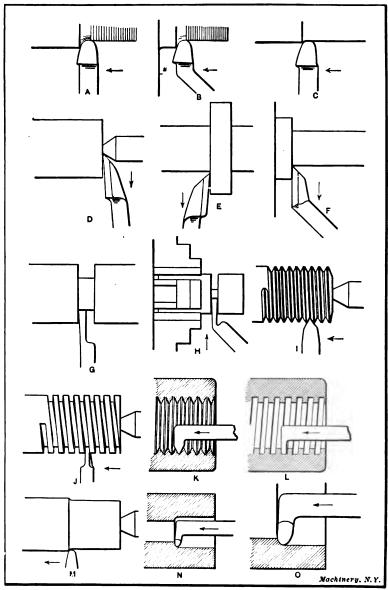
Views illustrating Use of Various Types of Lathe Tools
